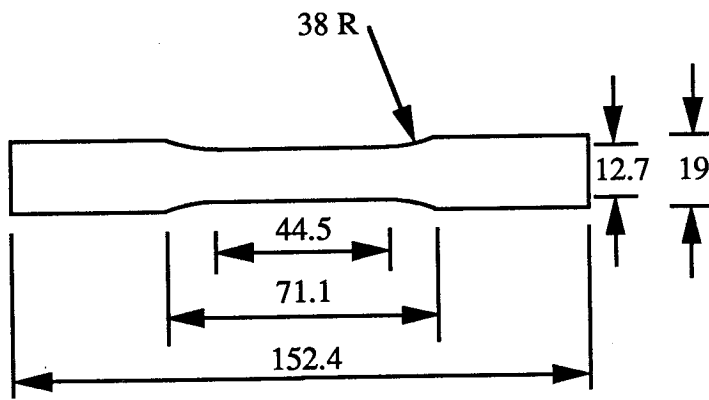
Tensile Test Specimen (All dimensions are in mm)
